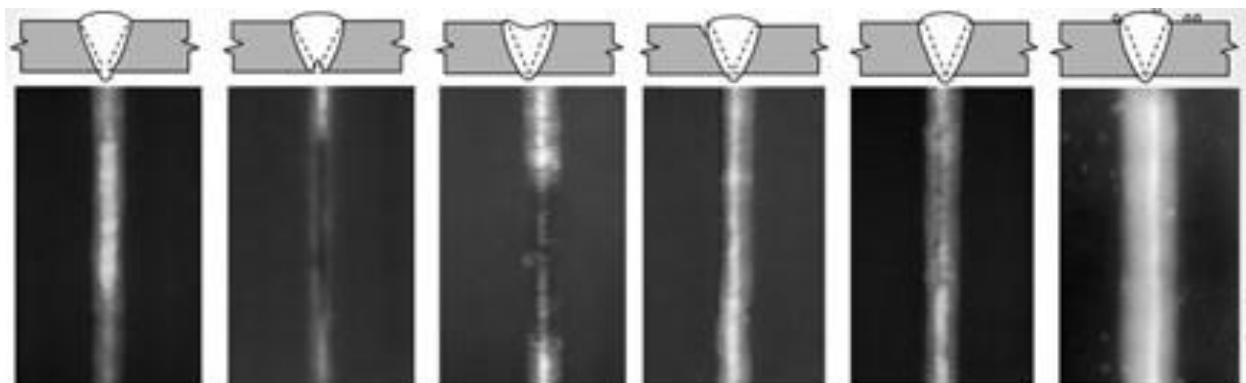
Example radiographic inspections performed on noncompliant welds.
